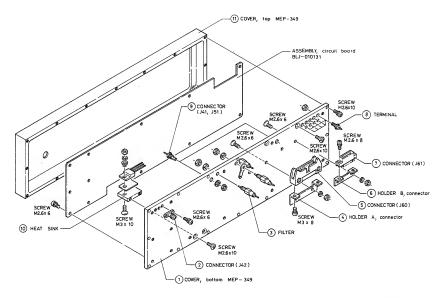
TR4172 MECHANICAL PARTS COUNTER BLOCK MEP-349 ASSEMBLY
